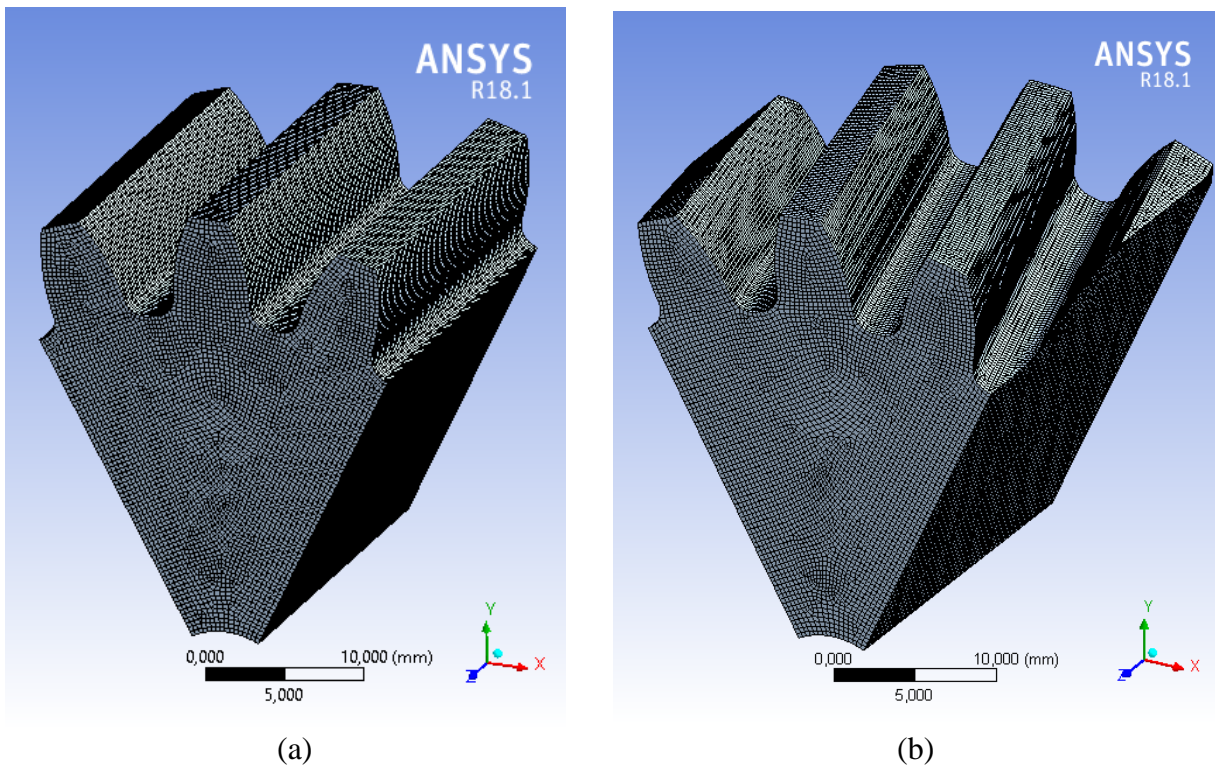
Gear structure models; (a) spur gear, (b) helical gear
